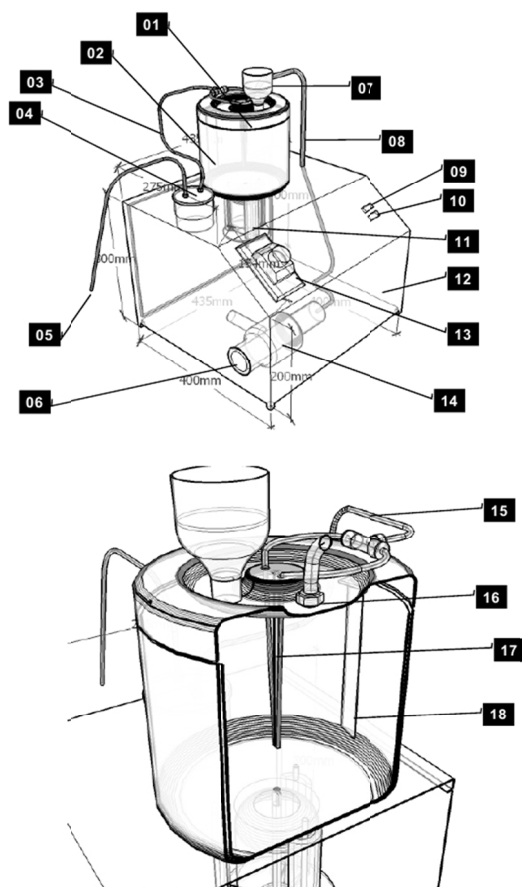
Isometric view of the prototype, longitudinal cut of the seed coating bowl and components of the prototype for seed coating
